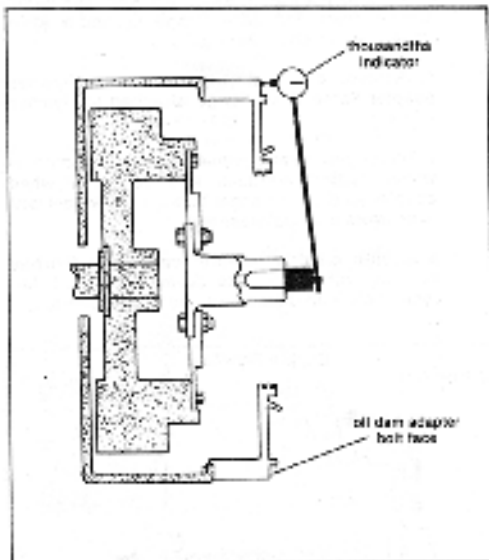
Dial Indicating Oil Dam Adapter Bolt Face
